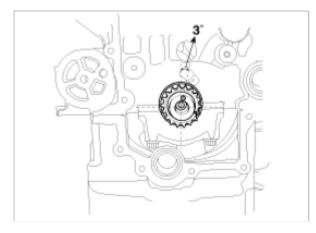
Identifying Crankshaft Dowel Pin Position Courtesy of HYUNDAI MOTOR AMERICA
